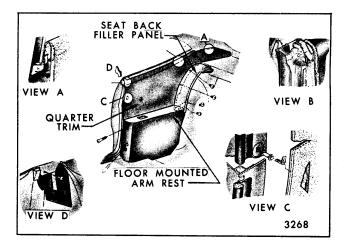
Rear Quarter Arm Rest and Trim Assembly – "A" Two-Door Styles
